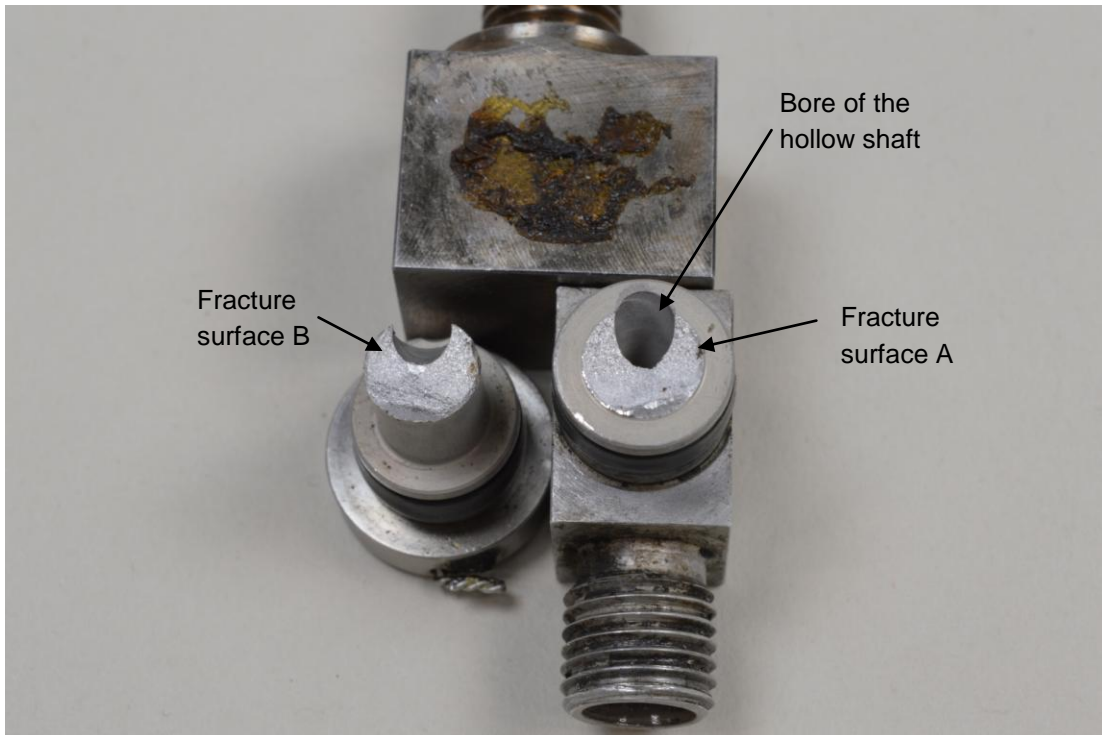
The two fracture surfaces (A and B). Bore of the hollow shaft.
